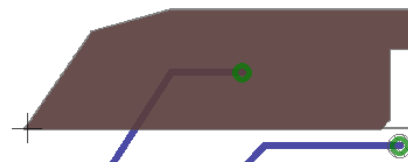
PCB design view of a solar chip pad. Notice the bottom right corner of the pad does not have solder, dark red. Because solder could not grab at the corner of the pad, the solar cell would come to rest at a crooked position. This required manual rework to fix each cell.
